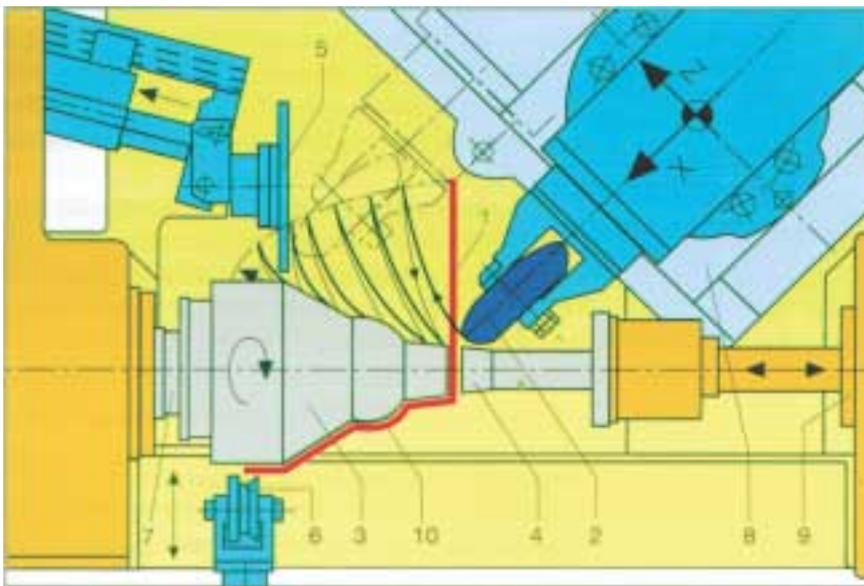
In multi-pass spinning, a disc blank or preform is clamped against a chuck by the machine tailstock and rotated by the drive motor. The spinning roller, on a two-axis compound slide, makes a series of sweeping motions, progressively forming the metal onto the chuck.
